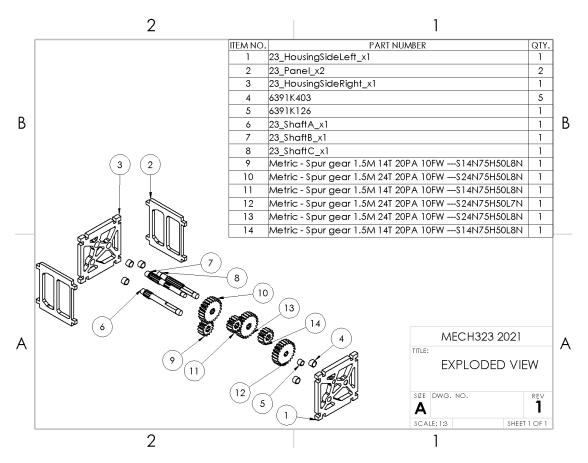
Full exploded view showing all components and assembly instructions. Included is a Bill of materials where the item numbers relate to the part numbers of the parts list.
